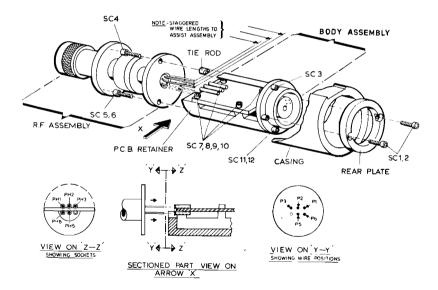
Access and Layout Diagram - 6920 Sensor
